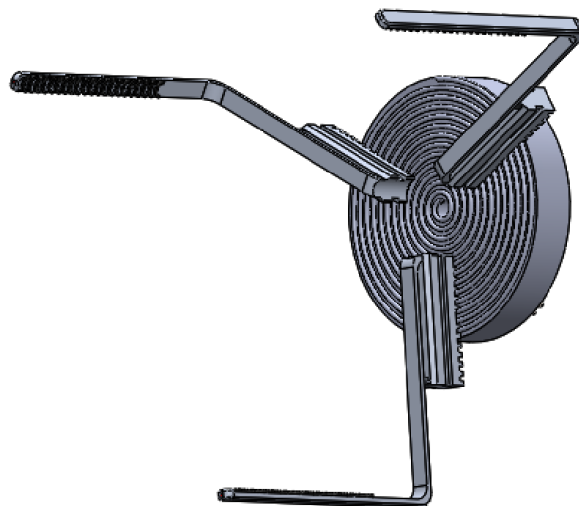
The Wheel Holding Module of the Mechanism Modeled with CAD Application
